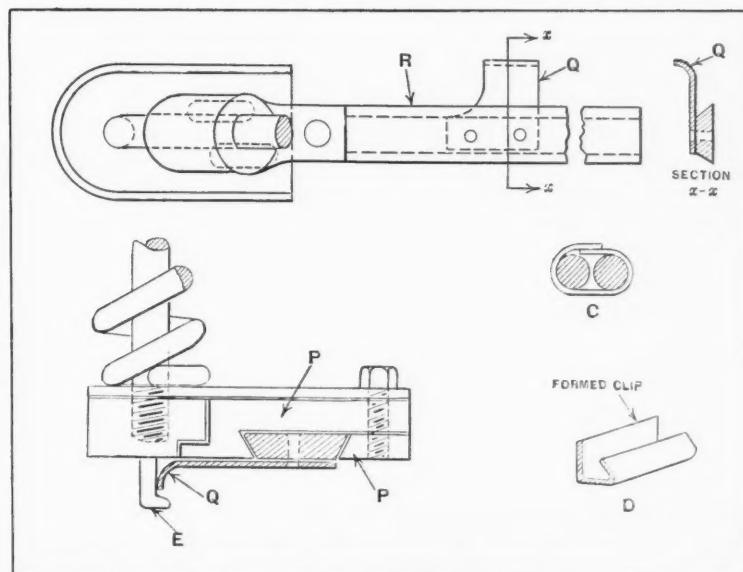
Formed Metal Clip and Parts of Ejector Used on Forming Punch
